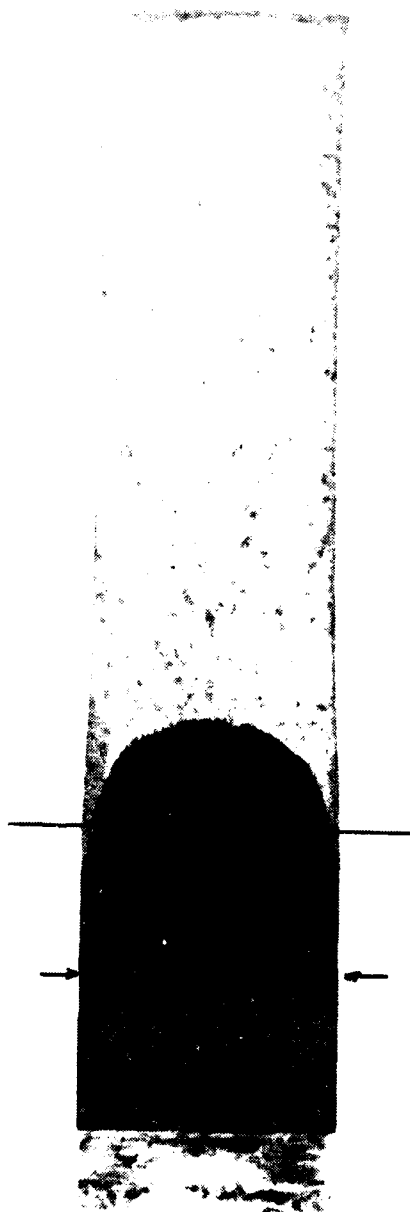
Fracture Surface - CT Specimen 11-3
